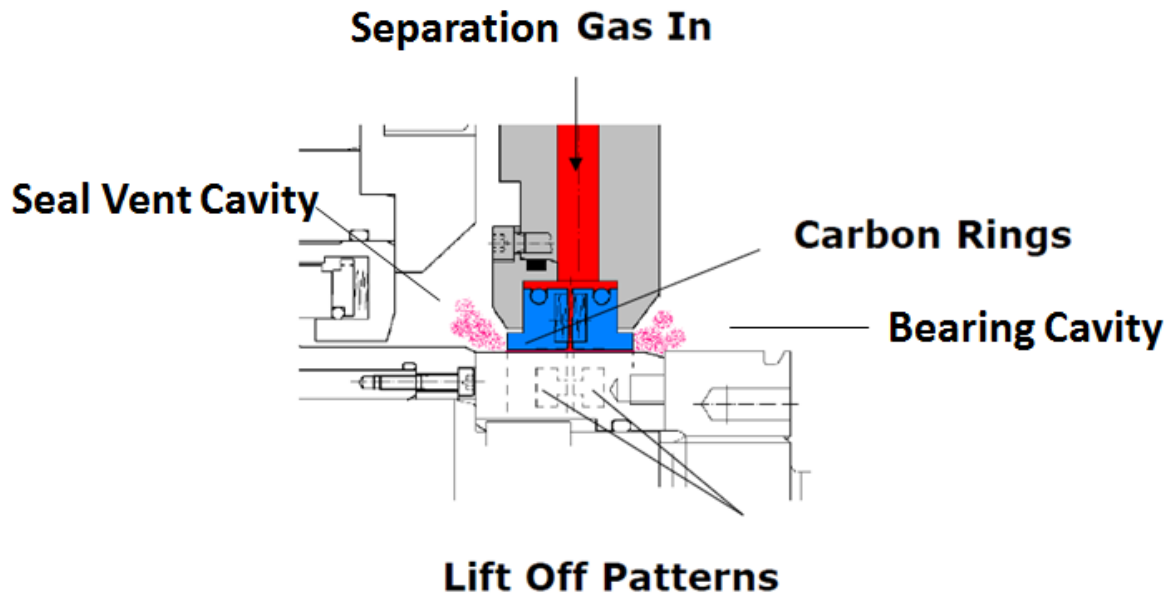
Representation of Non-contacting Segmented Carbon Ring Seal [2]
